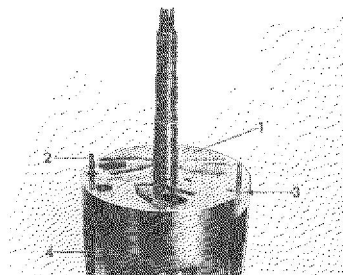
B: Compressor - Engine 116 & 117 - Steps 15-22 (3 Of 7)
